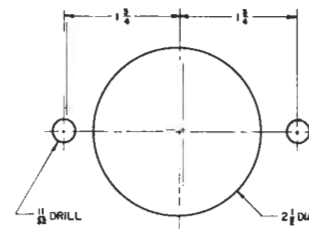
C Horizontal feed tube mounting dimensions for 1 1/2" EMT.
